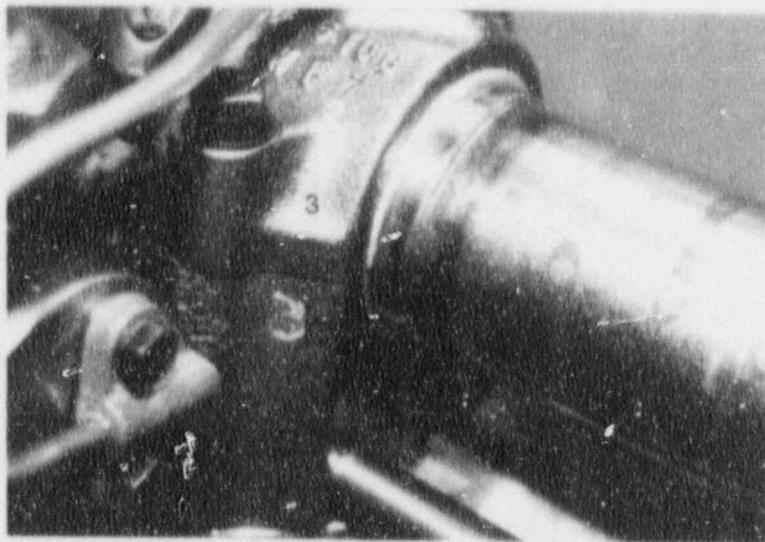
View of the left rear top deck and bearing block number 3. The inboard bearing block bolt was found in place and tight, and the outboard bolt was found in place but backed out a few threads.
